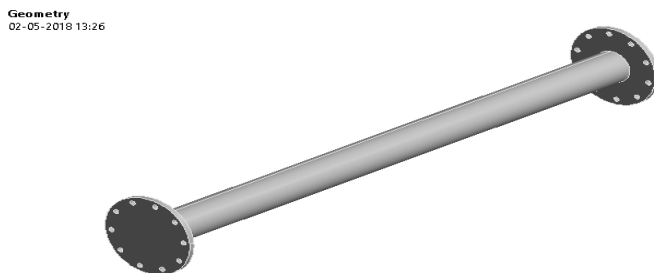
Isometric view 3d model of CRFP intermediate shaft
